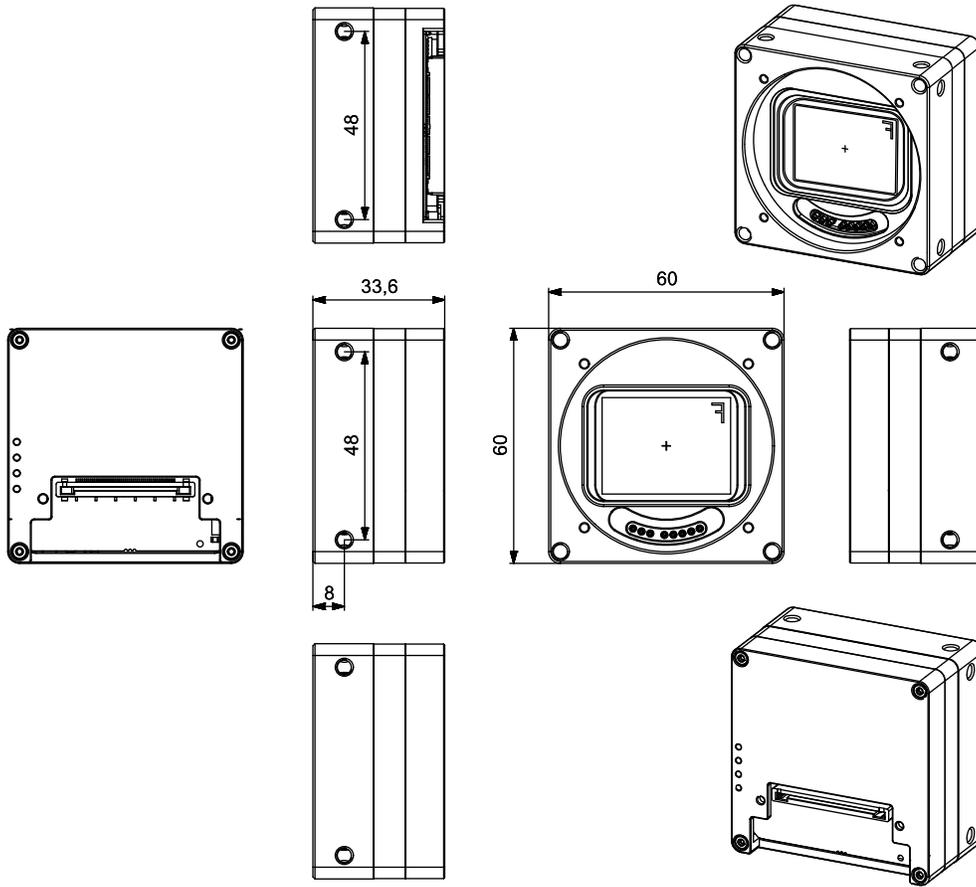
Dimensional drawing of MX200xG-CM-X4G2-FV
